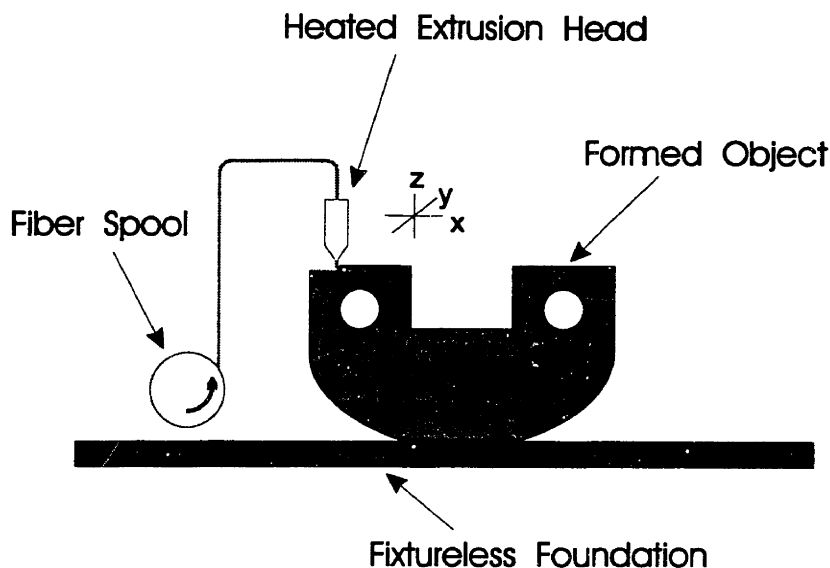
Heated extrusion head is used to shape three dimensional objects in Fused Deposition Modeling (FDM) process.
